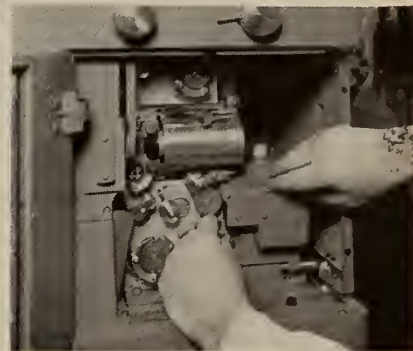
A standard guide-roller assembly. Note the set-screw by means of which the roller may be adjusted laterally.
